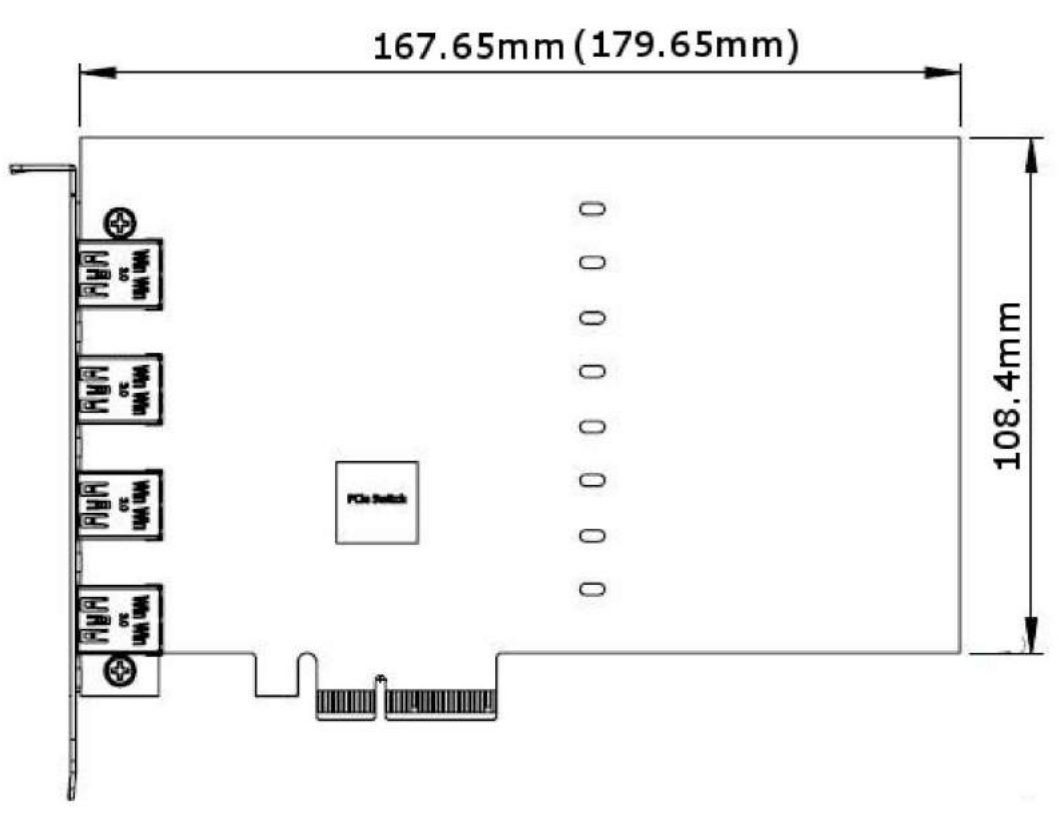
Maximum PCB Size of Add-on Card Supported by Expansion Cassette
